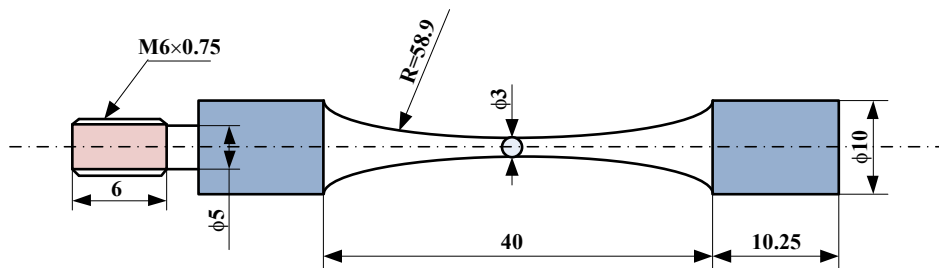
Shape and dimensions of VHCF specimen machined from the 25Cr2Ni2MoV steels for testing at ultrasonic frequency
